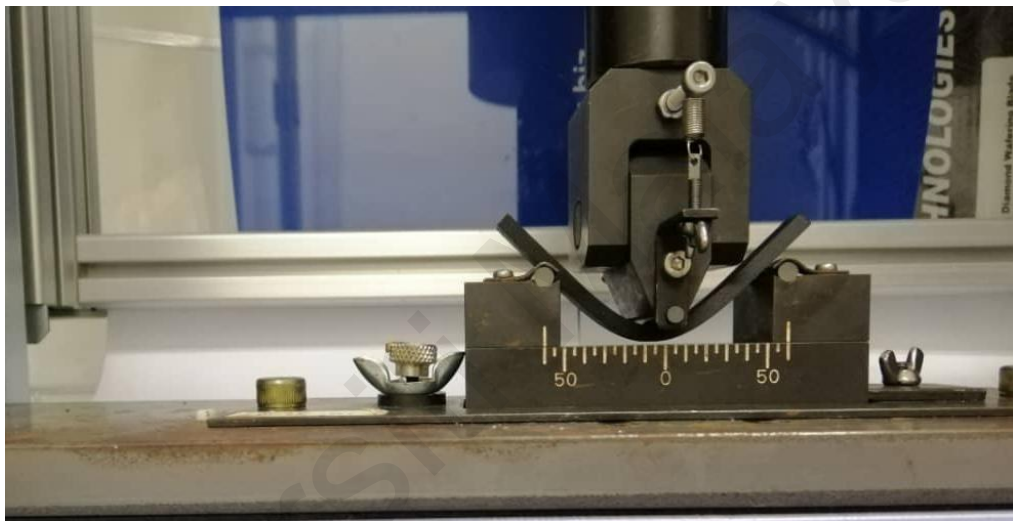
Universal testing machine used for bending test from SHIMADZU
